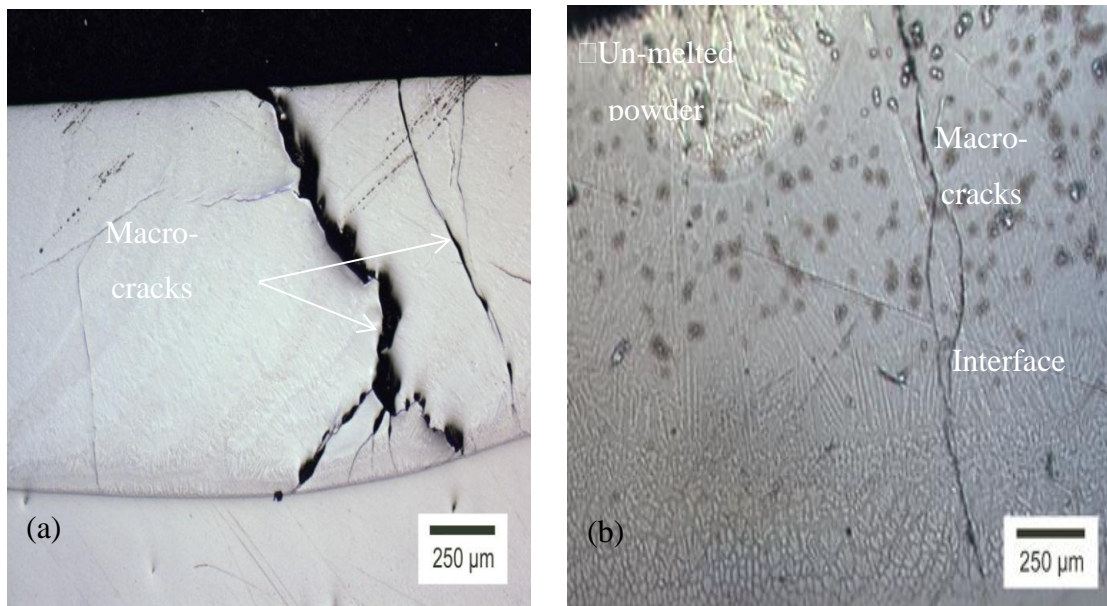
Inconel 625 clad deposited on to Ti6Al4V workpiece at 1000 W (a) un-etched sample with cracks, and (b) Deposit showing cracks using preheating of 540°C during LMD process.
